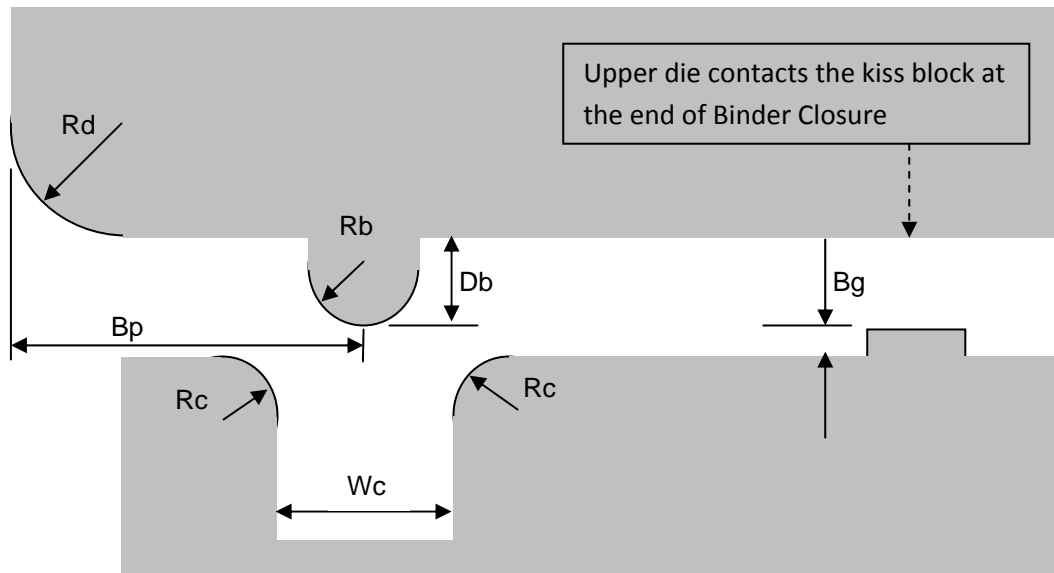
Kiss block and Drawbead Dimensions and Location. Note the upper die and lower binder are shown in an OPEN position [23].
